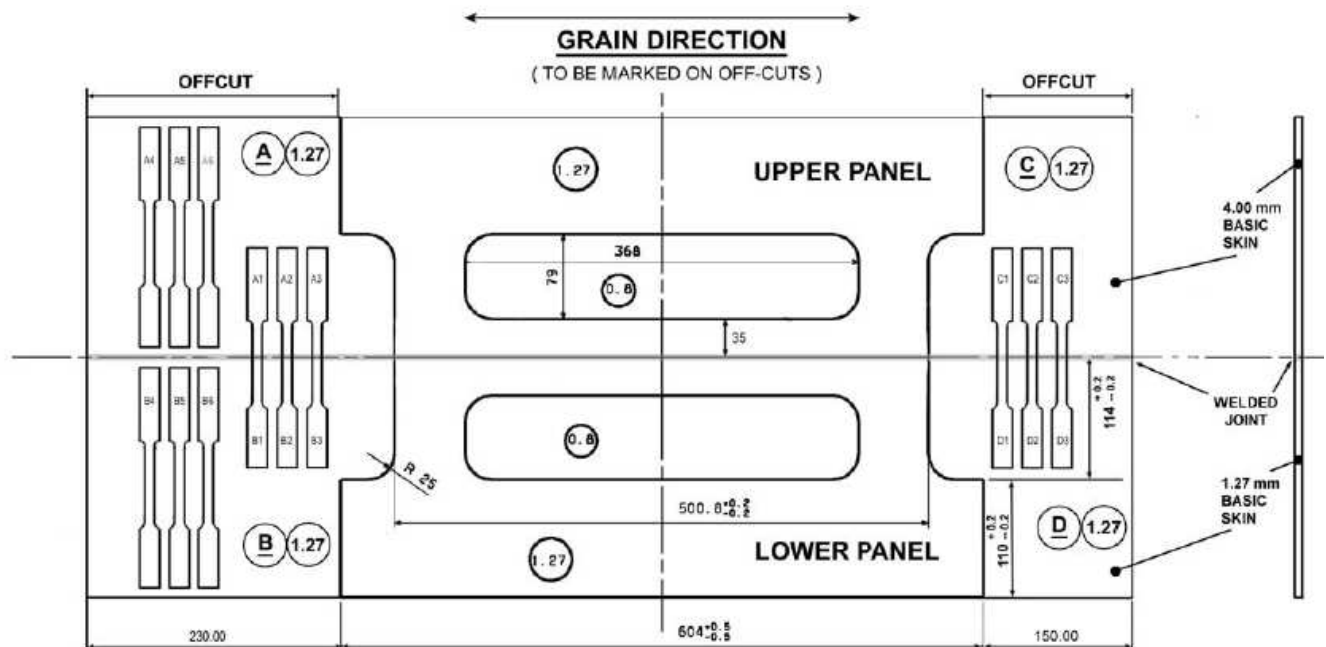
Phase 1 – cutting of tensile test specimens in representative areas of the welded panels
